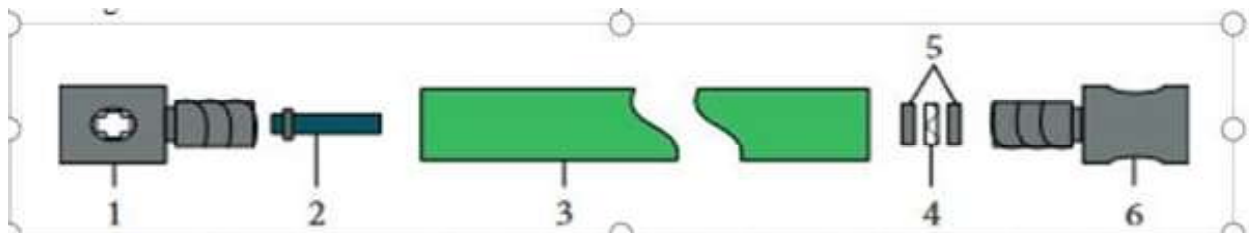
(a) : Schematic diagram of a liquid carbon dioxide fracturing device. 1: pneumatic valve; 2: heating device; 3: liquid storage pipe; 4: energy-releasing sheet; 5: sealing gaskets; 6: releasing pipe.
